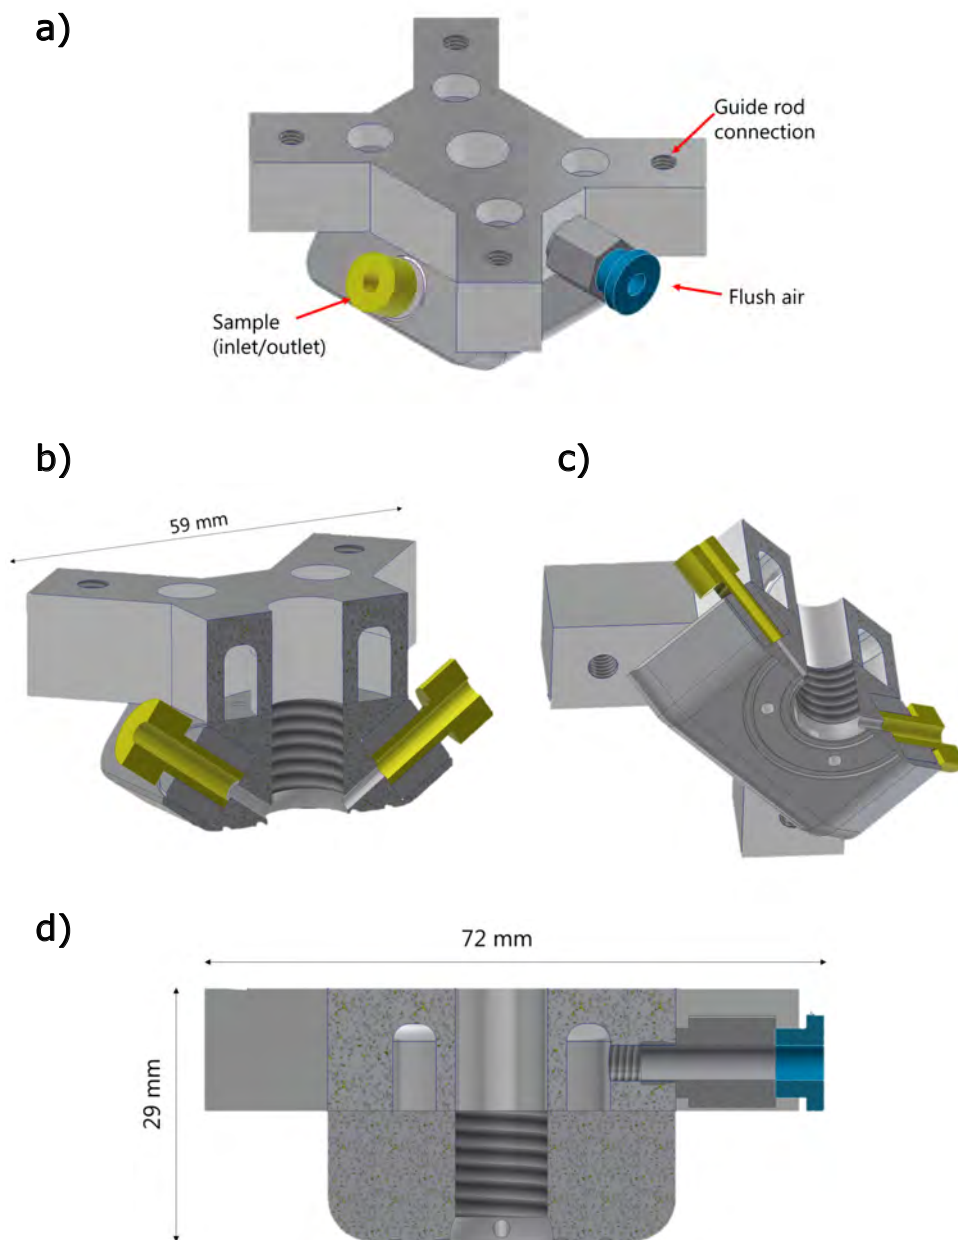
Initial prototype of the ablation chamber for the fs LA-CRDS system. (a) Top view showing guide rod connections, sample inlet/outlet, and flush air port. (b) and (c) Cross-sectional views illustrating the sealing mechanism and internal structure. (d) Side view with dimensions of the ablation chamber, highlighting the chamber geometry.
